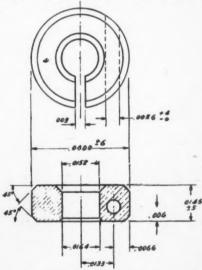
Drawing of hairspring collet in Hamilton watch.
